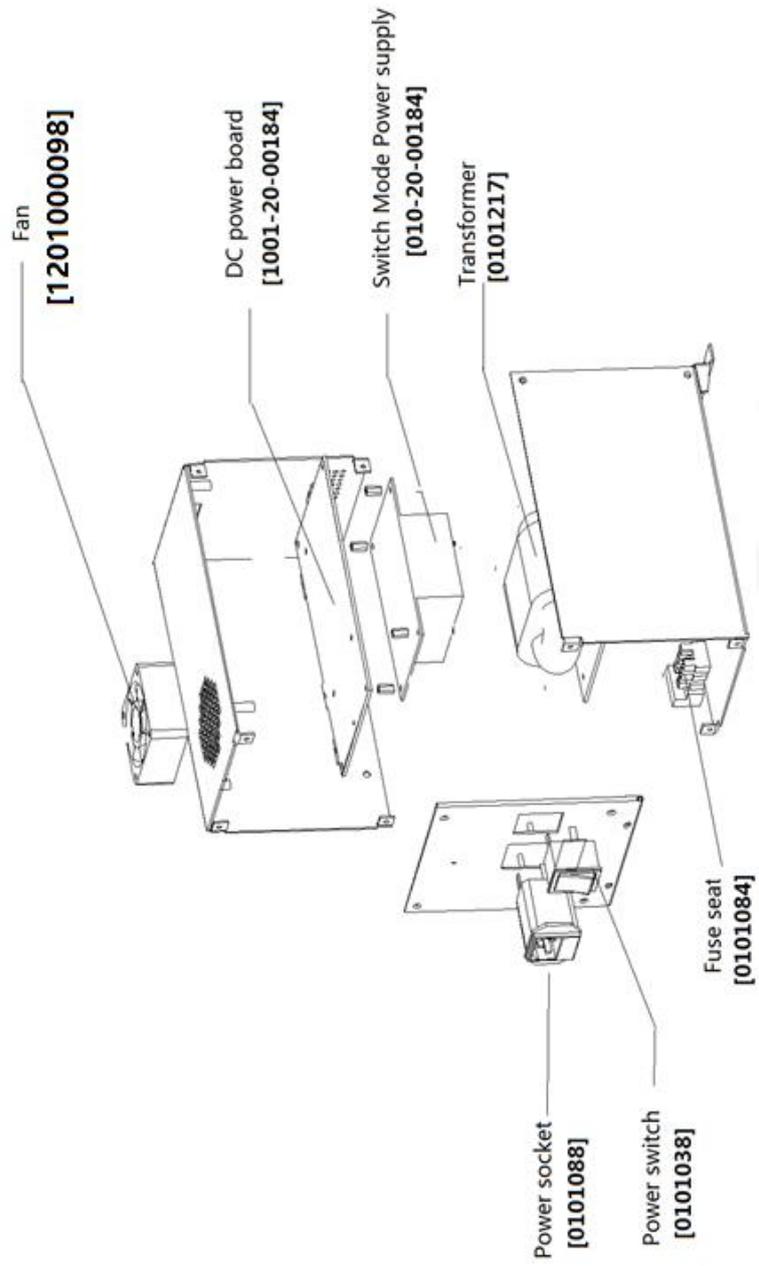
POWER SUPPLY ASSEMBLY
